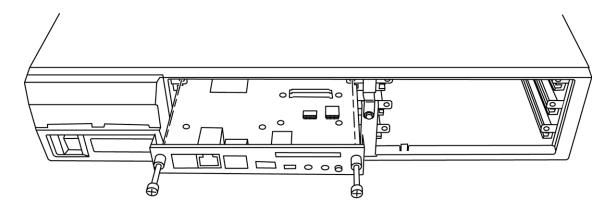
Inserting Blades in the 19" CHS2U-US Chassis
